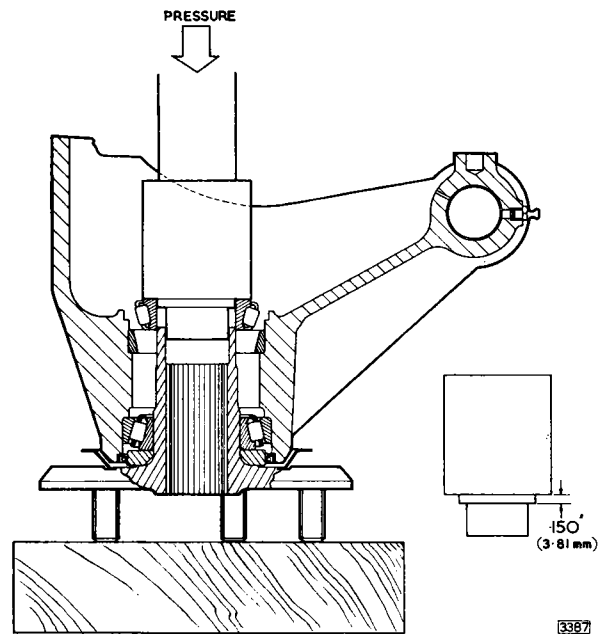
Pressing in the hub inner bearing inner race using Master spacer, (Churchill Tool No. J.15)
